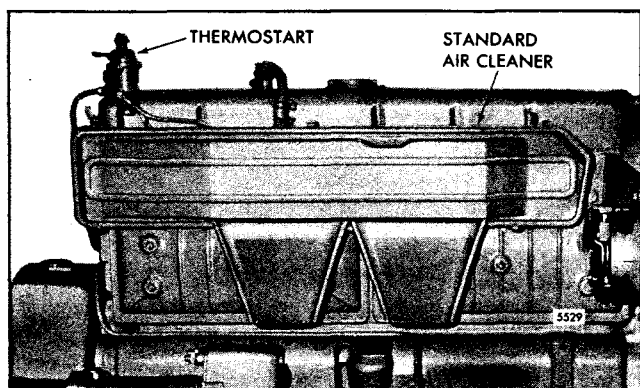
Combination Air Cleaner and Air Inlet Manifold
